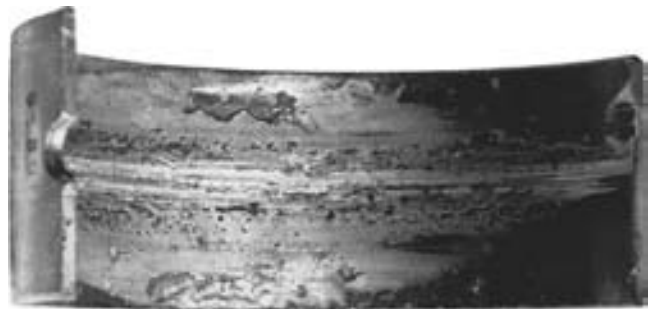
Shape of fatigue cracks in a bearing. If the bearing is subjected to continued high loads, the cracks expand and eventually cause the bearing material to flake off from the steel backing.
